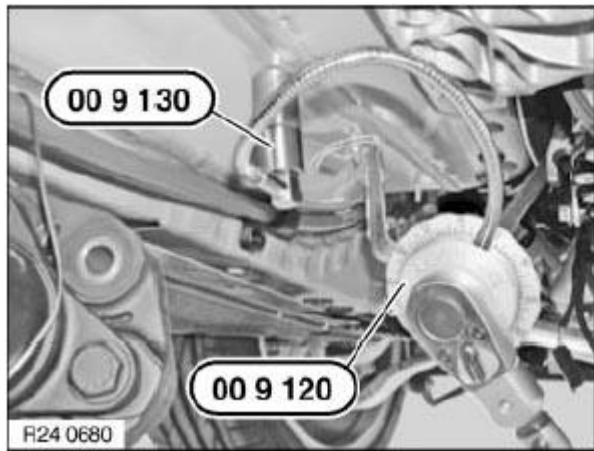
Identifying Special Tool 00 9 120 And Magnet 00 9 130
